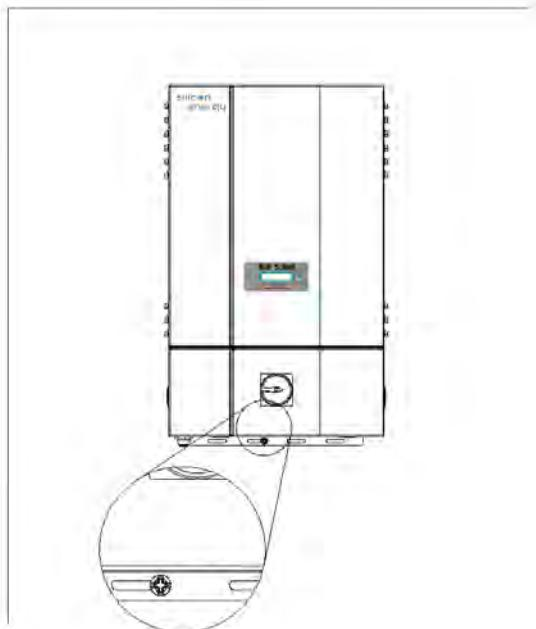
Hook the Inverter on the mounting bracket and then fasten the screw
